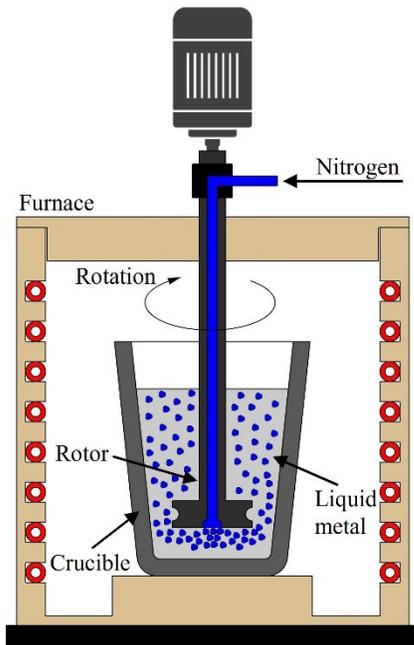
Schematic view of the liquid metal cleaning process with rotary degassing.
